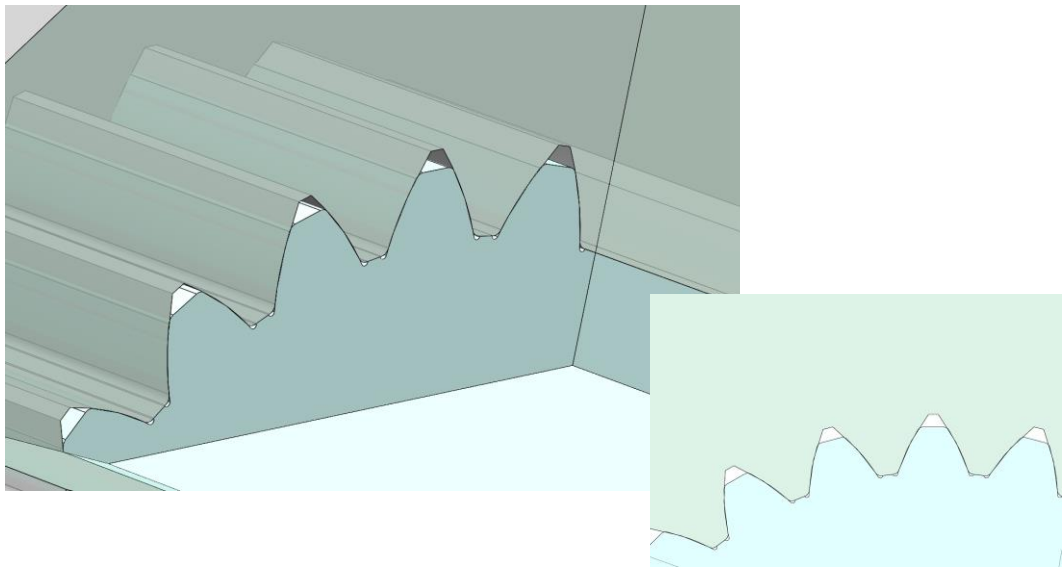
Shaft-Hub Connection / Root Diameter Centered
